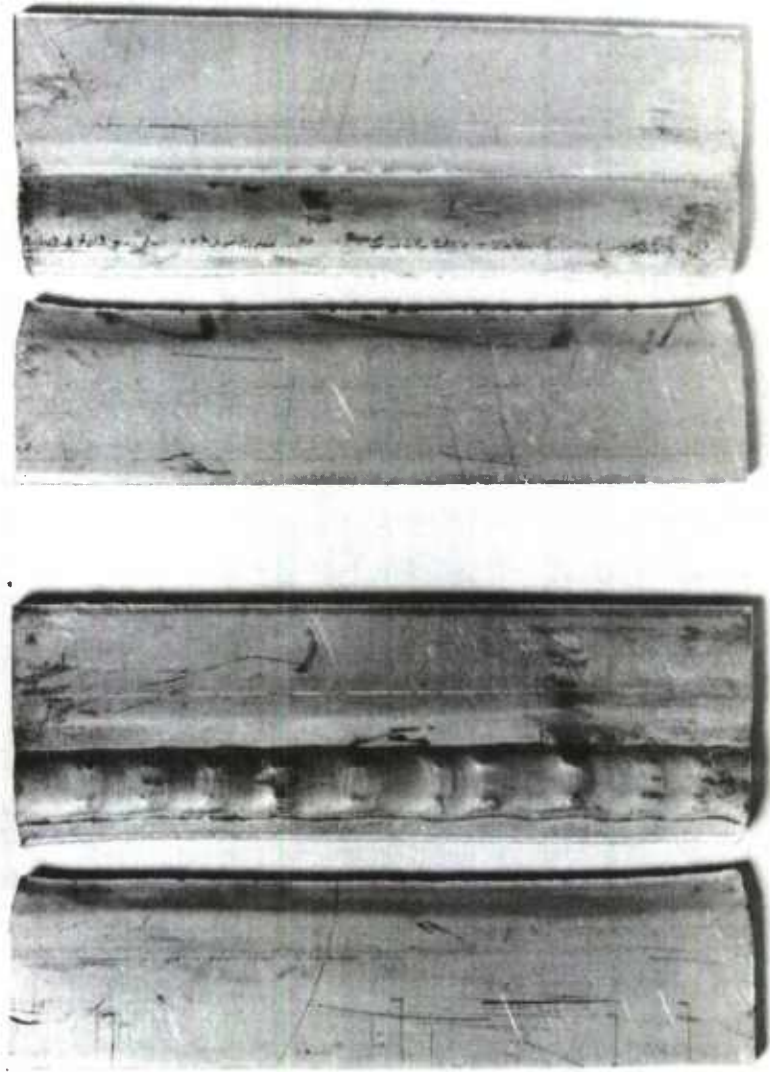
Fractured Fatigue Specimens 5052-H38 Aluminum Alloy (78° F)
